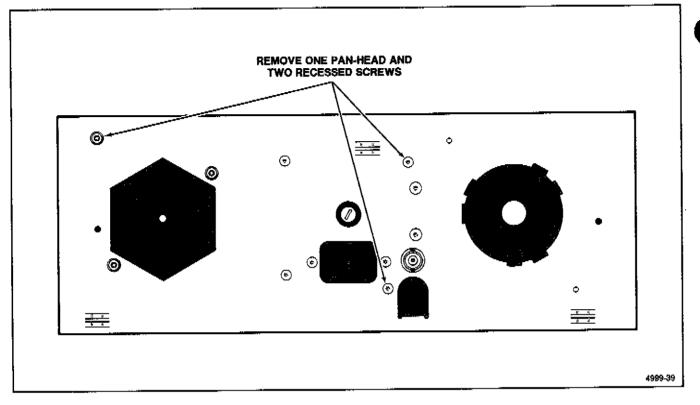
Location of acrews securing Power Supply shield and the support bracket to the rear chassis frame.
